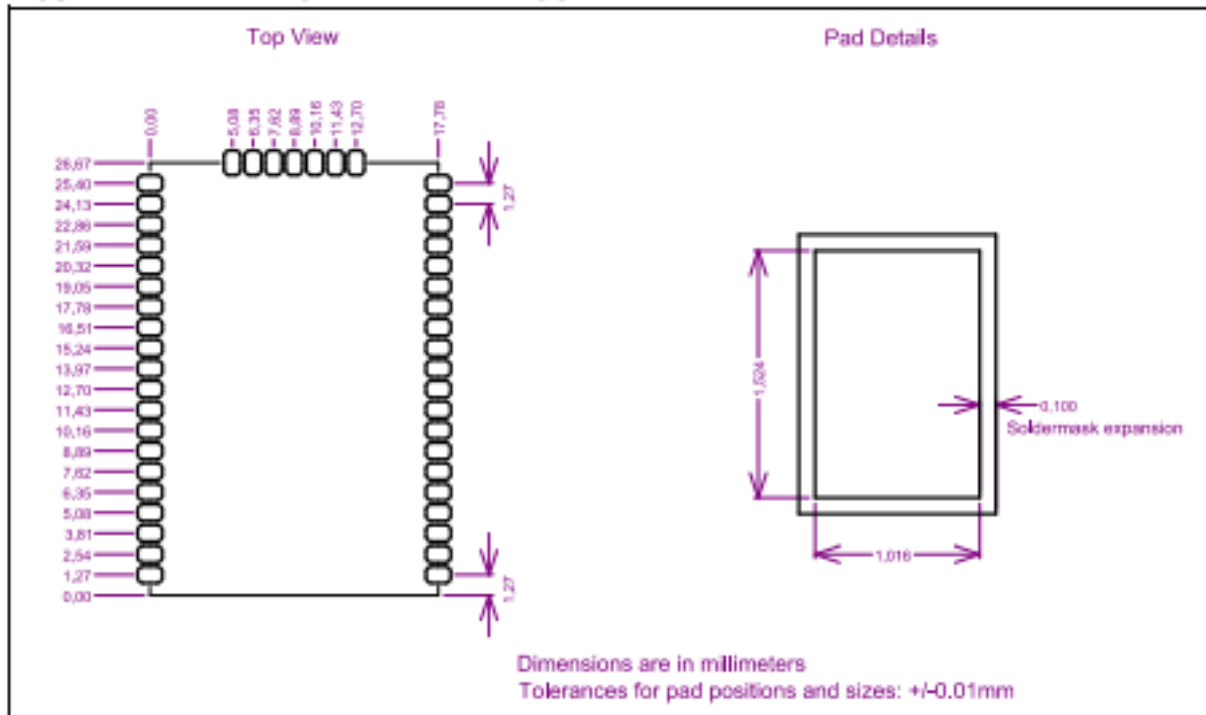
RECOMMENDED PCB FOOTPRINT
